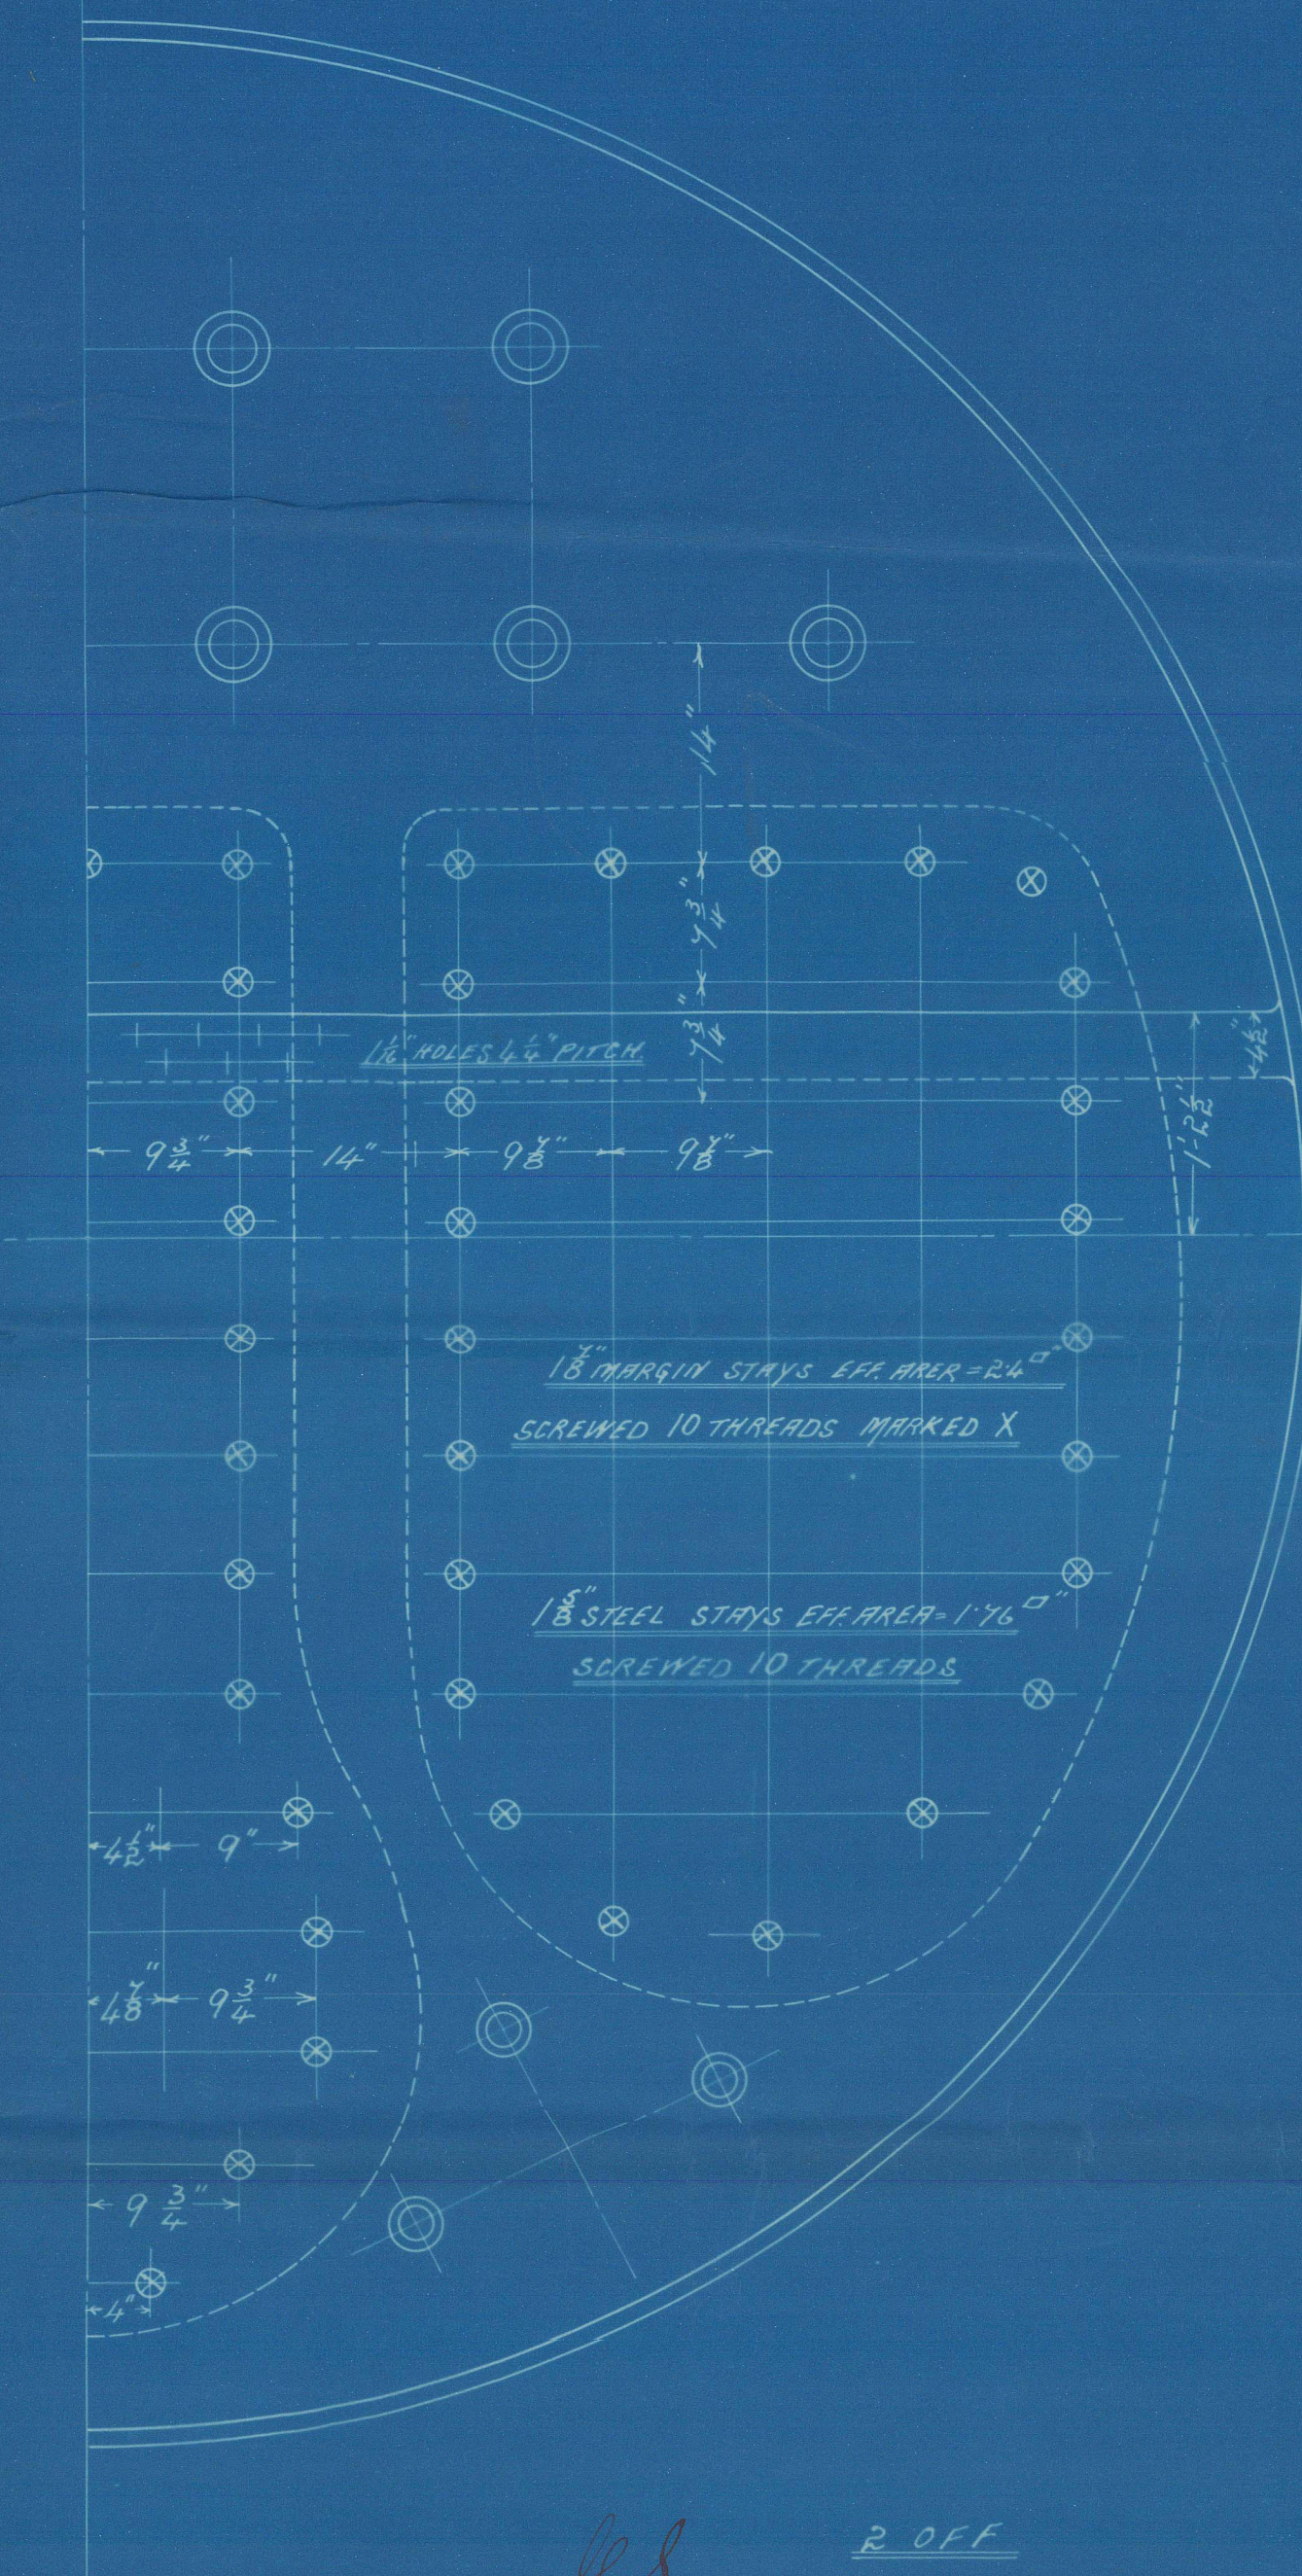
'-5 1/2" DIA MANHOLE 10'-11 1/2"
